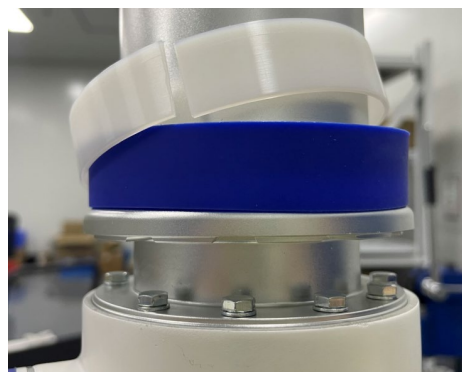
Remove the upper arm rubber ring and the supporting ring
